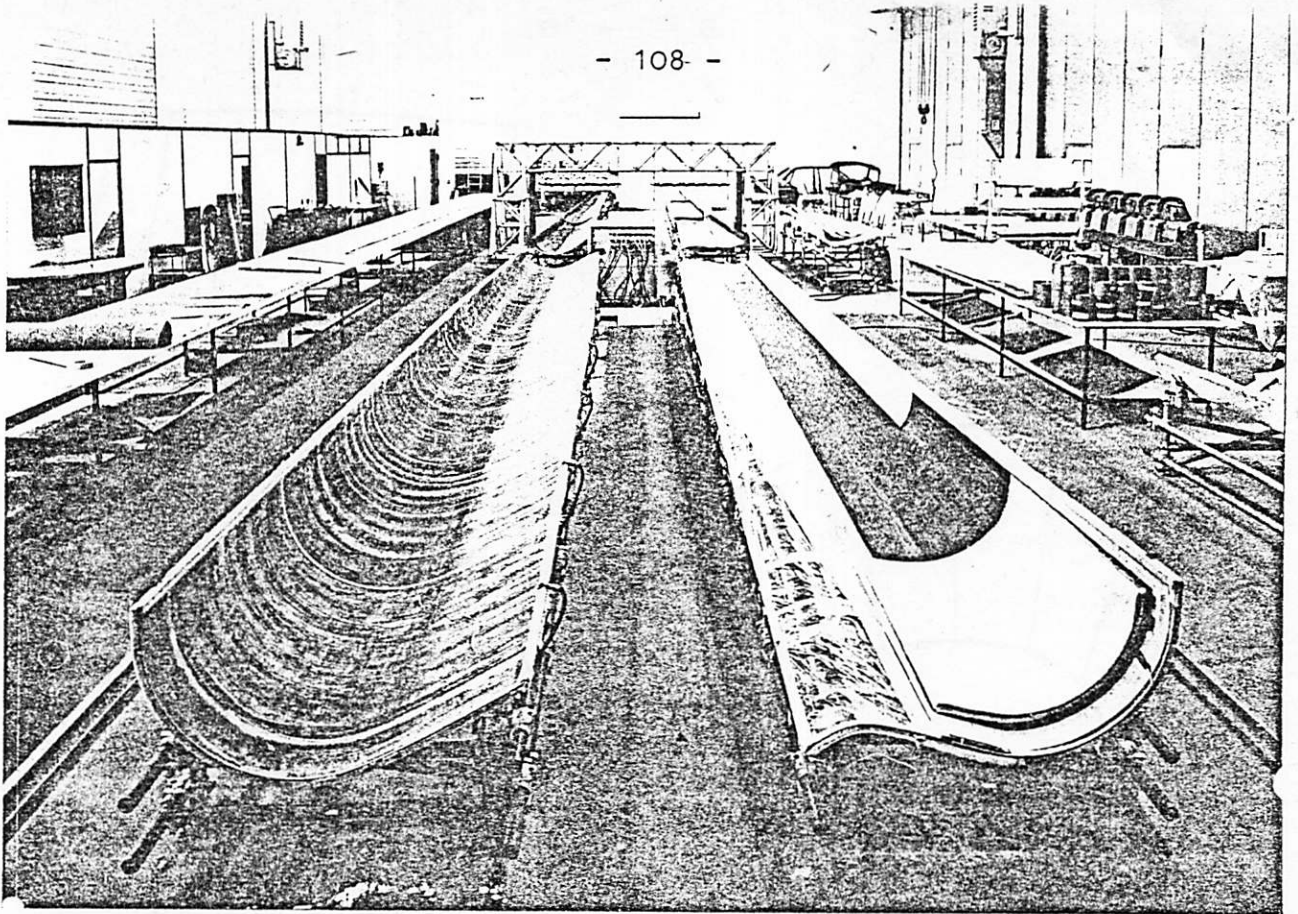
MOULDS OF THE UPPER AND LOWER SIDE OF THE WEC ROTOR-BLADE
